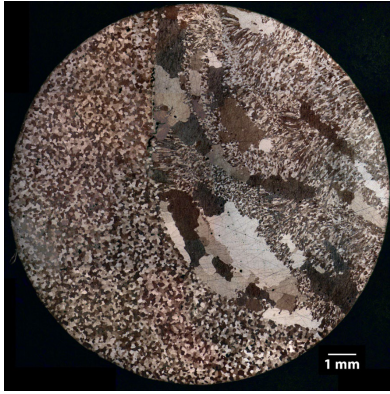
Cross section of a tensile bar containing weld repair made with 2319 weld wire.
